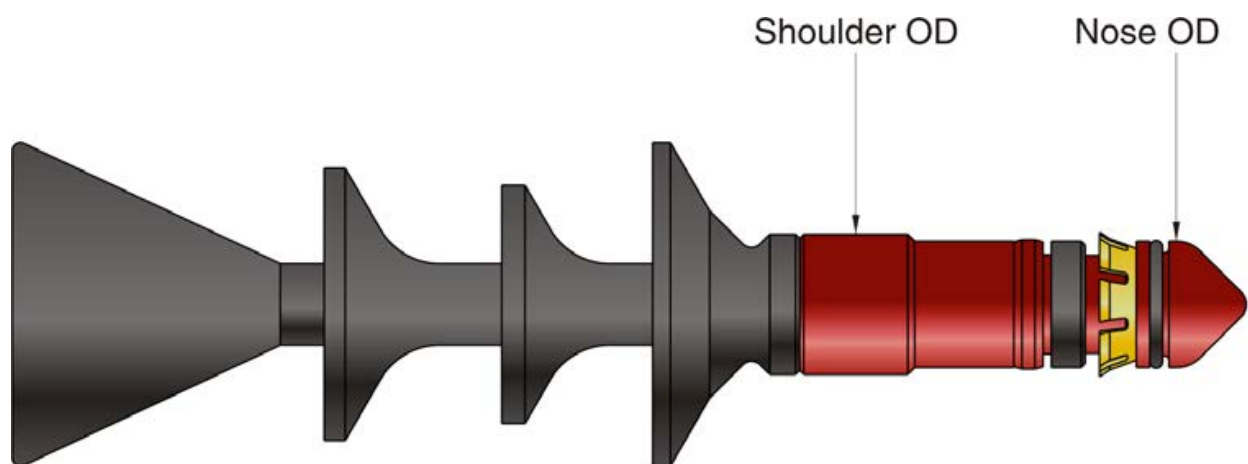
The BHKA disconnect tool wiper dart is selected according to workstring size.
